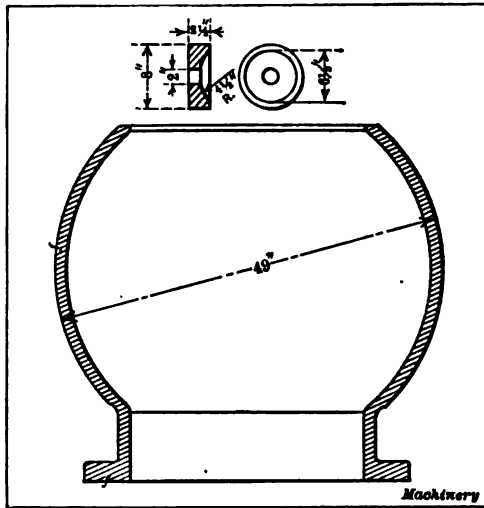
Cup Washer and Ball Pipe Joint — Examples of Concave and Convex Turning
